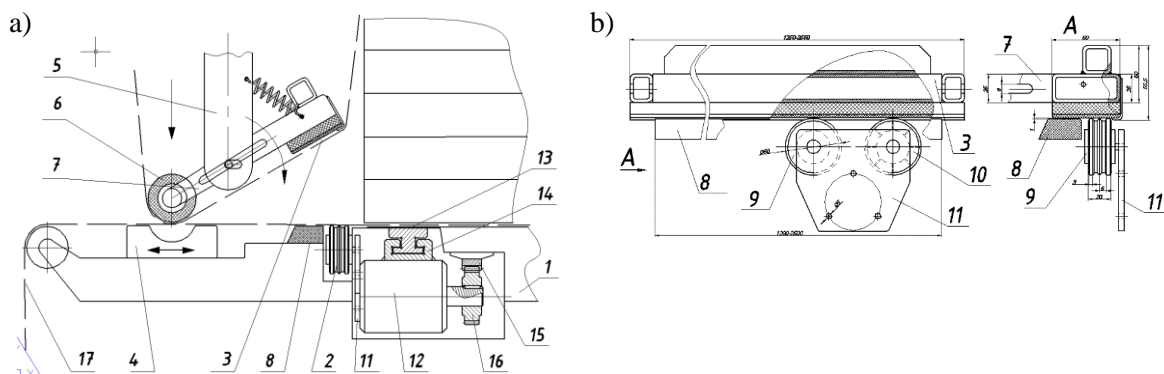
General view of the package wrapping, closing and welding unit (a) and view of the welding mechanism at the moment of contact – the side and the frontal view of the welding mechanism(b): 1 – stretching table; 2 – welding mechanism; 3 – pressure jaw; 4 – counter pressure; 5 – tightening unit; 6 – pressure roller; 7 – support arm; 8 – support jaw; 9 – constant heating roller; 10 – cooling roller; 11 – bracket; 12 – motor – gearbox; 13 – guide bar; 14 – carriage; 15 – rail gear; 16 – gear; 17 – packaging film
